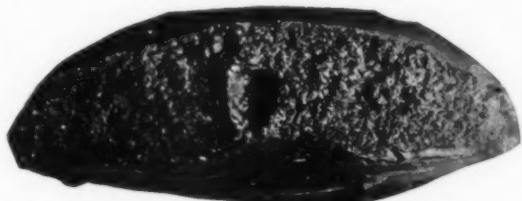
Sample No. 2, Fracture of Boston & Montana Copper. Set copper, contains 6.16 per cent Cu_2O . (Magnified 1.5 diam.)
